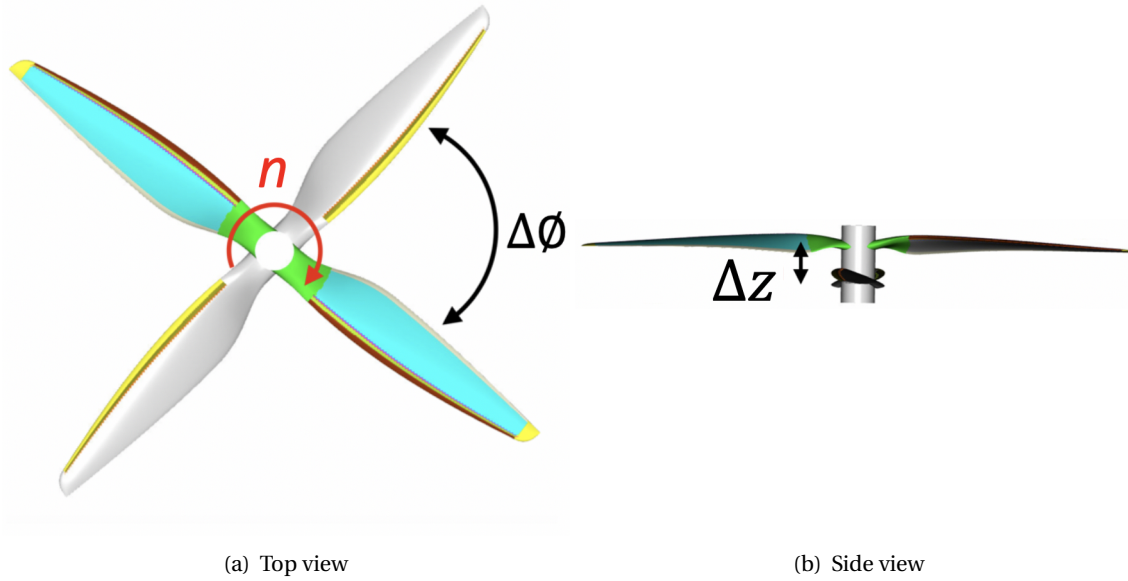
Co-rotating rotor geometry with important geometrical parameters; upper rotor (light blue) and lower rotor (grey)
